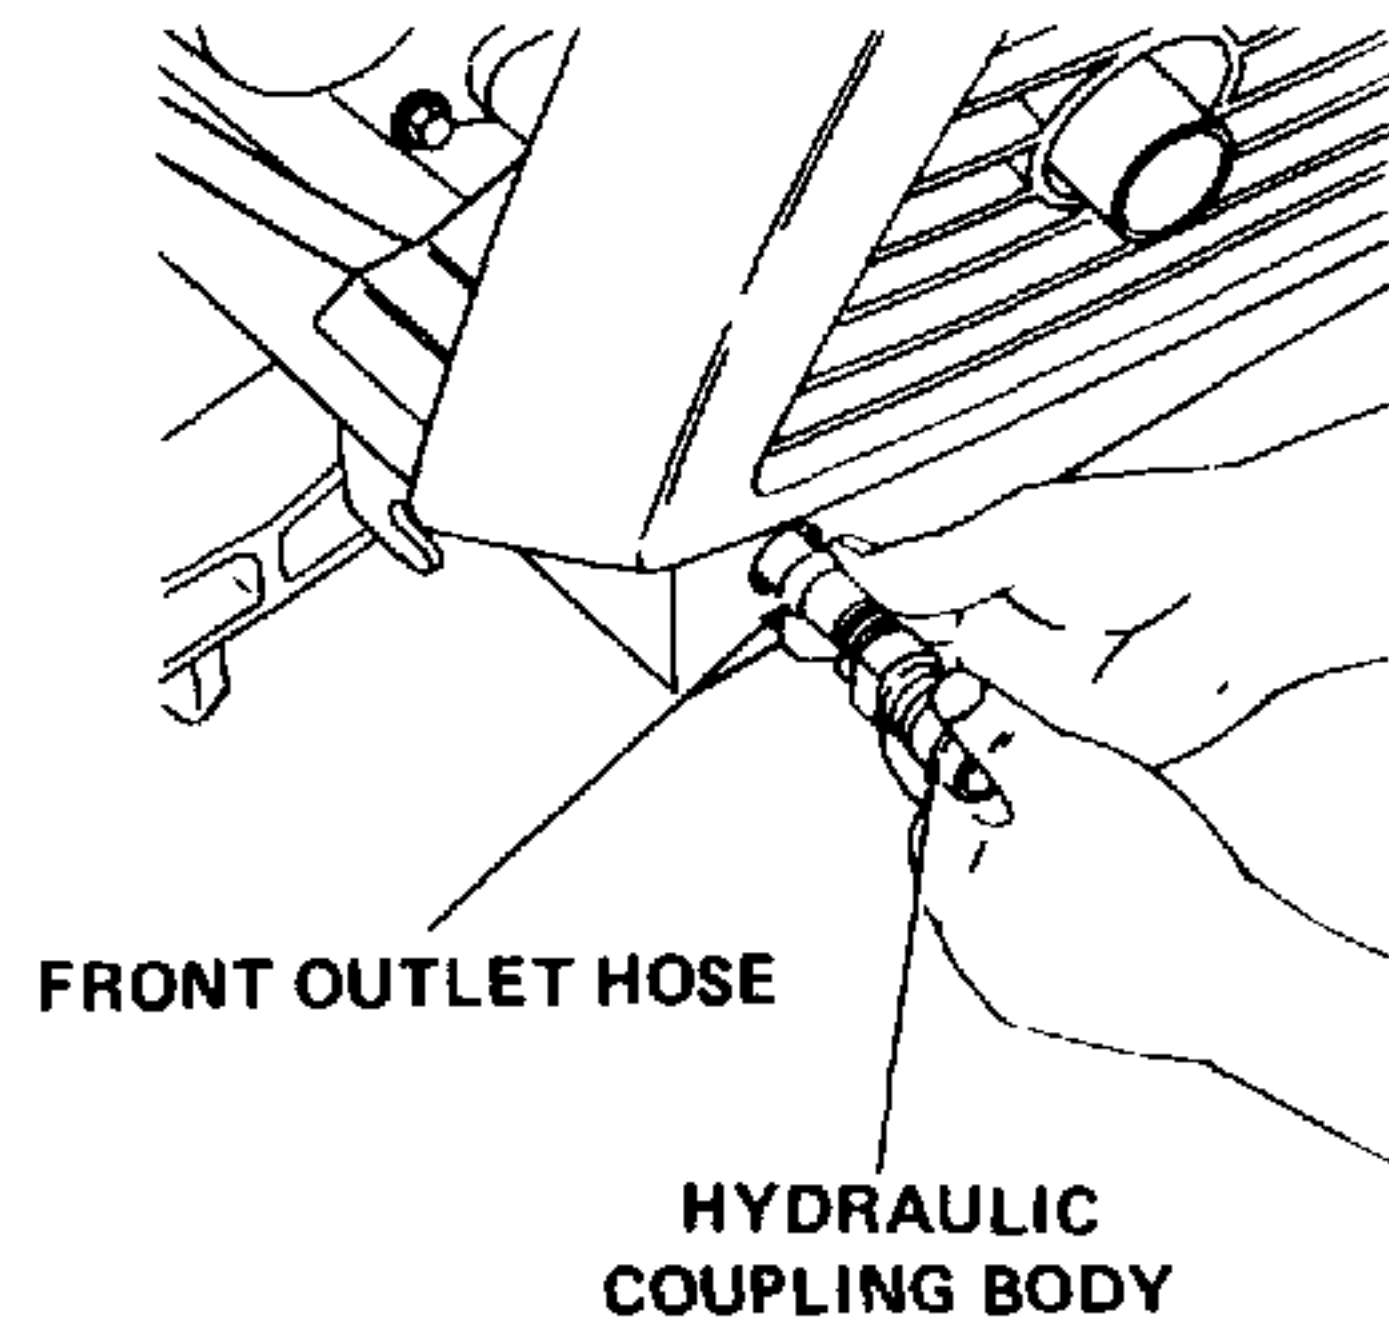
Threading Hydraulic Coupling Body Onto Front Outlet Hose.
